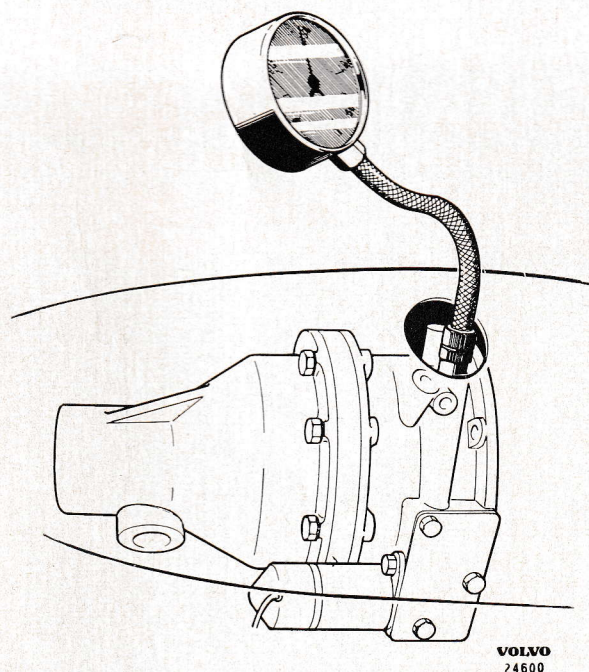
Checking oil pressure with pressure gauge SVO 2415
